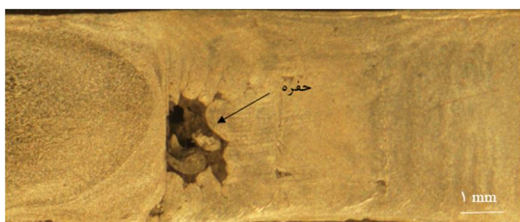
Welding macrostructure performed at a speed of 1180 rpm with the help of Bobbin tool made from hot-worked steel H13
